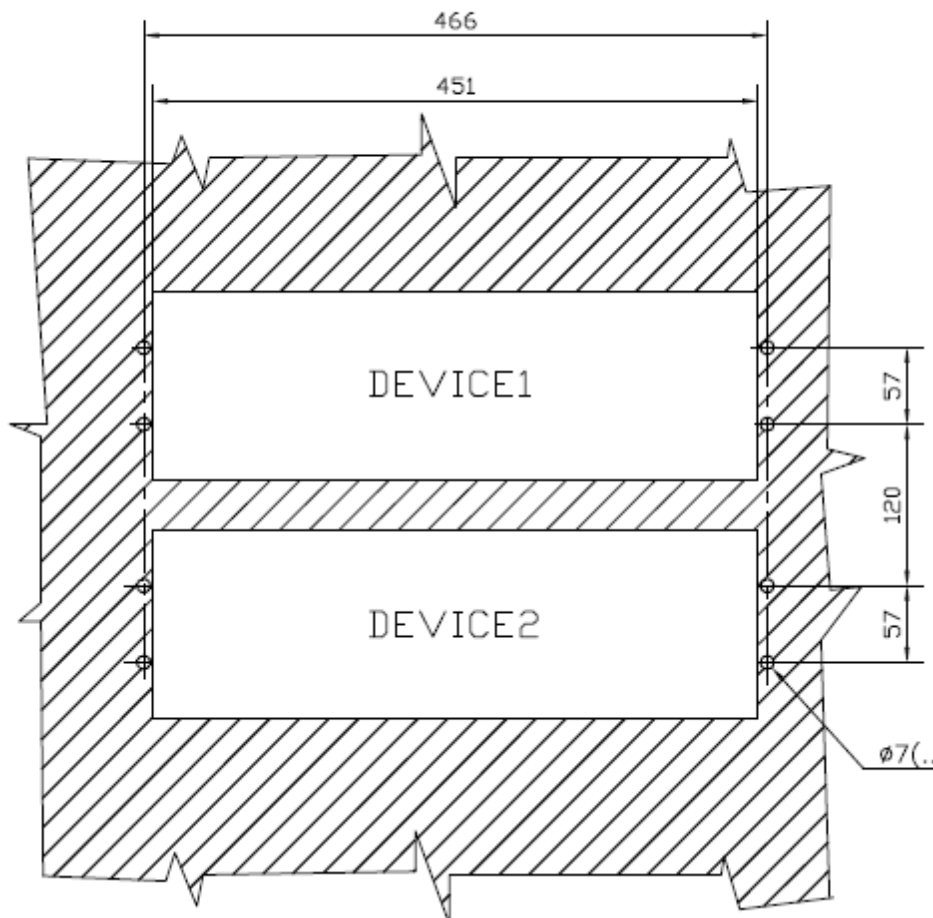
Panel cut-out and spacing of AQ-39x IED.
